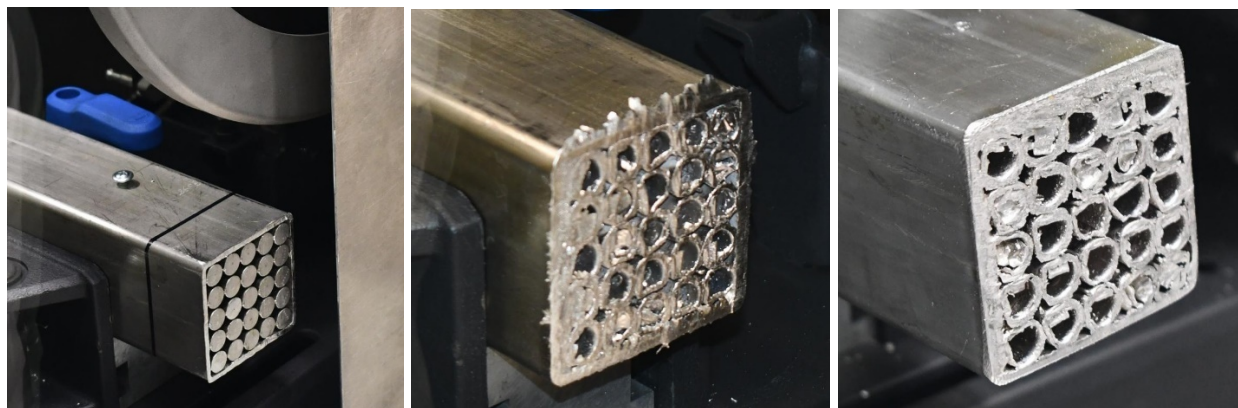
Cutting through the plenum region of Fermi-1 radial blanket assembly (left), cut open ends of elements in assembly before (center) and after (right) filing edges of square duct.
